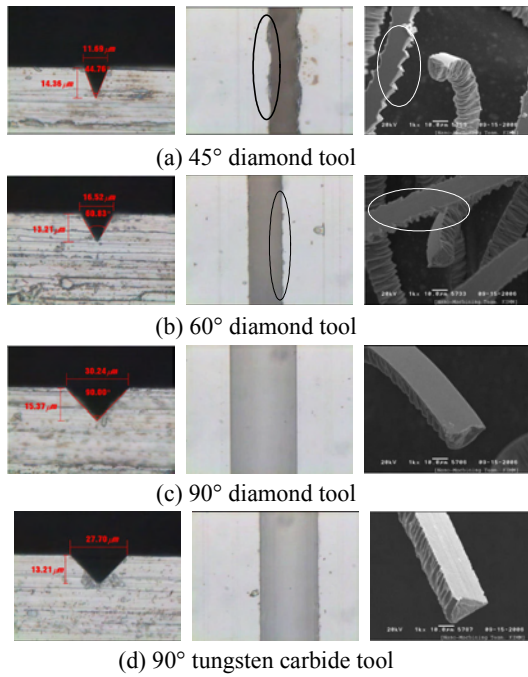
Machined V-shaped microgroove (cutting depth 15 μm, feed speed 10,000 mm/min)
